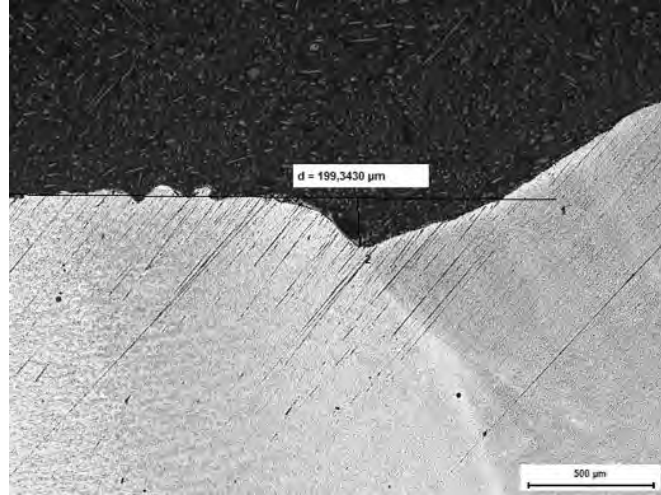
Butt weld, under-cut 0.5 mm.
